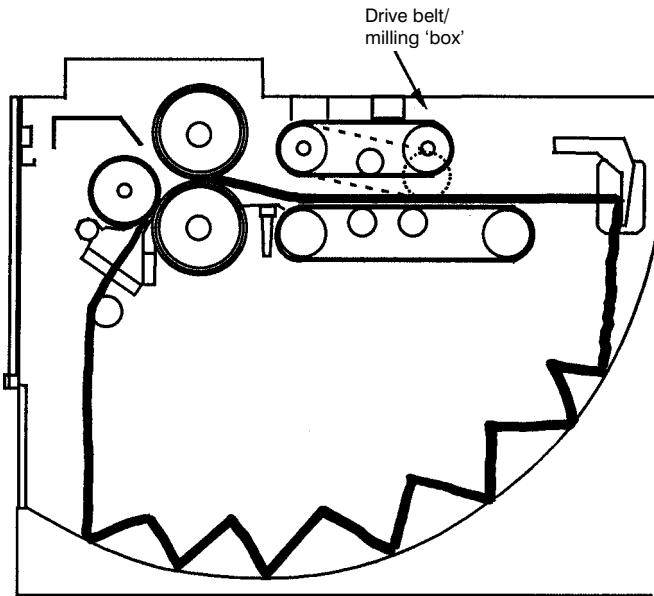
Rollers and belt drives used to replace milling box (derived from [85])
